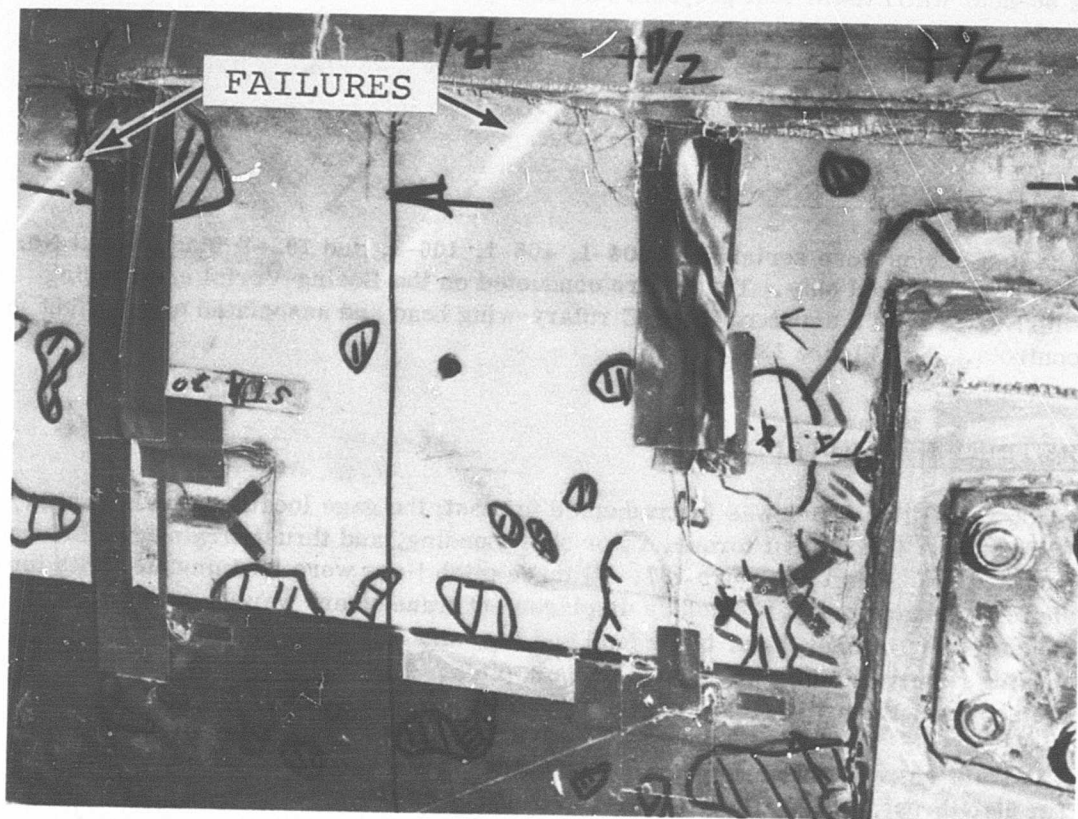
Failures of Inboard Blade Section Serial No. 107-1 After Rework.
